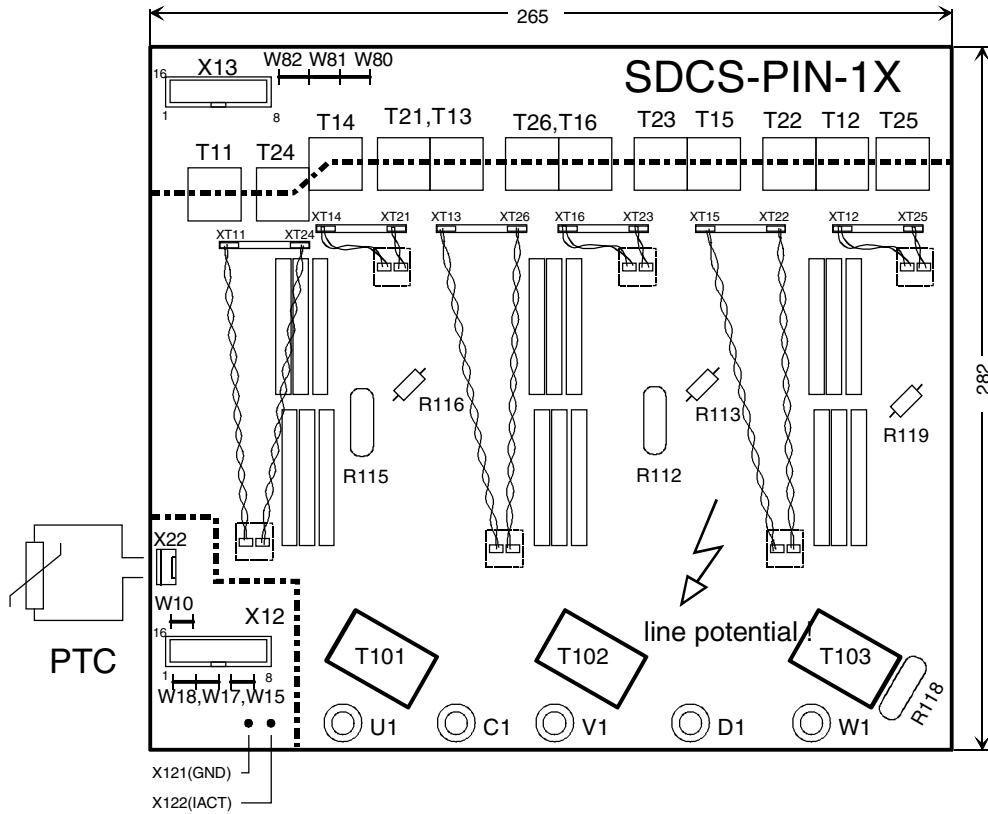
/1 Layout of the SDCS-PIN-1x board.
